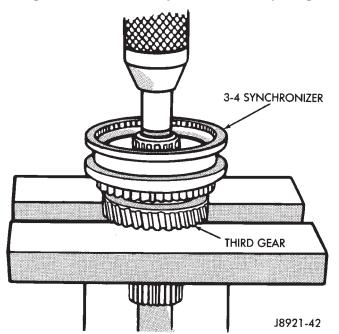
Remove 3-4 Synchronizer And Third Gear
